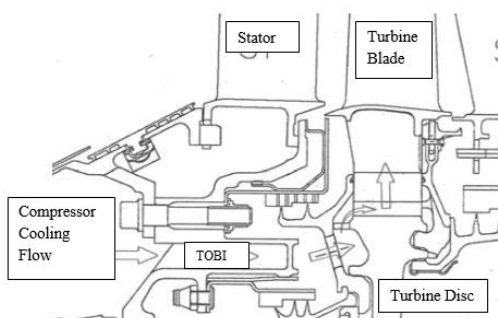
PW F100-229 Turbine Rotor TOBI Cooling the Cooling Air to the Blade [4]
